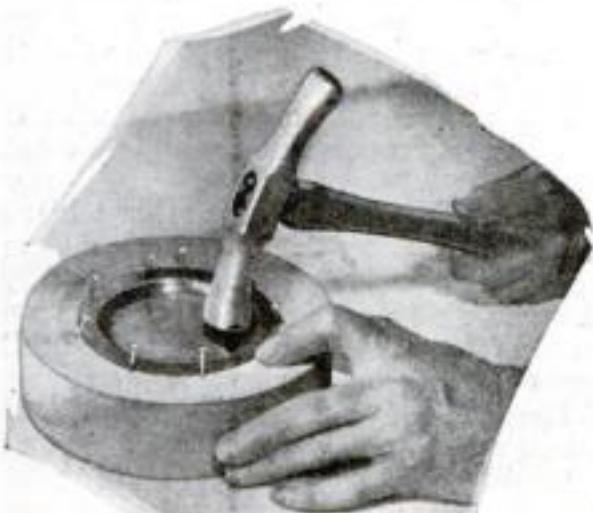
Using an embossing hammer to drive the sheet copper into a turned mold of hardwood.
